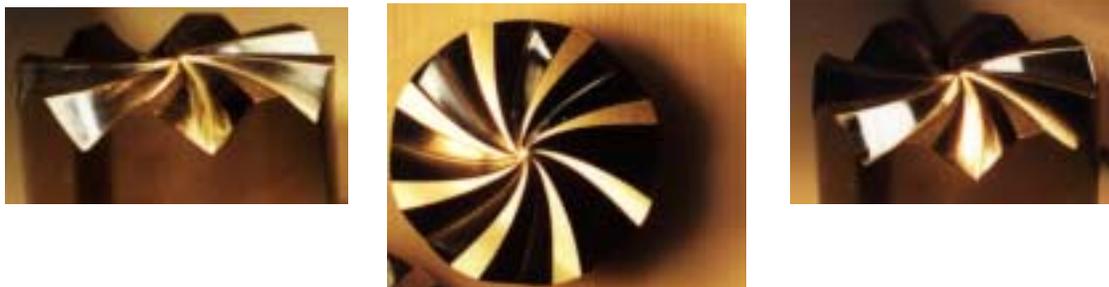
Views of a rotor geometry based on HSM principles (20g machine)
